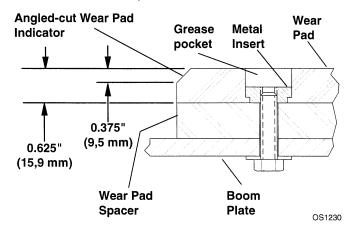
Inspect the boom wear pads for excessive wear, gouging or other damage.
